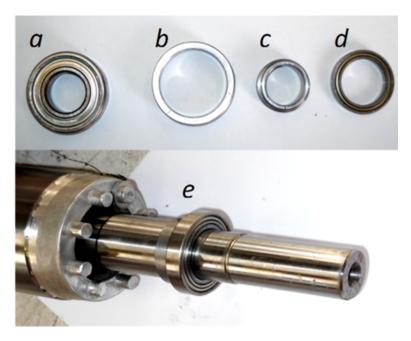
Rotor of the eccentric motor unit. Top, from left to right: a) original bearing, b) external and c) internal eccentric rings, and d) new bearing. Bottom: e) mounted unit on the shaft.
